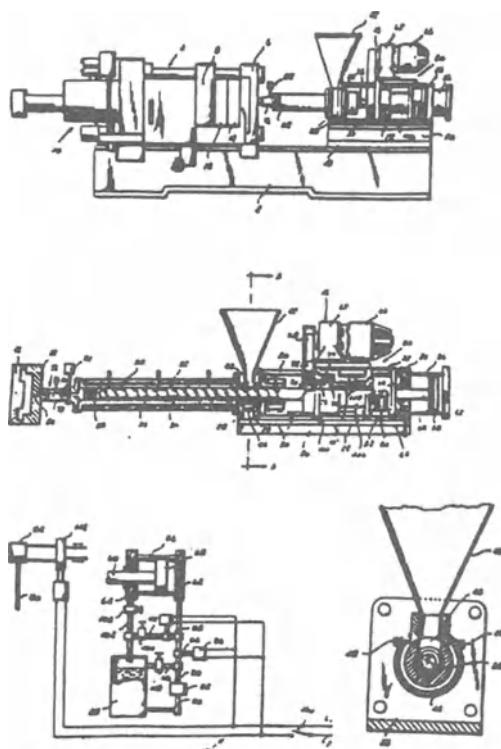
W. H. Willert reciprocating screw plasticator patent issued 1953.
